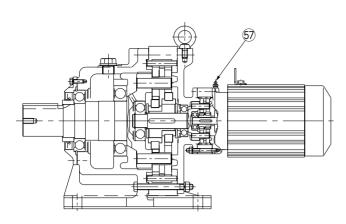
Type CHHM (Horizontal • Gearmotor) Double Reduction (Example : Frame size grease lubricated 6185DB)
